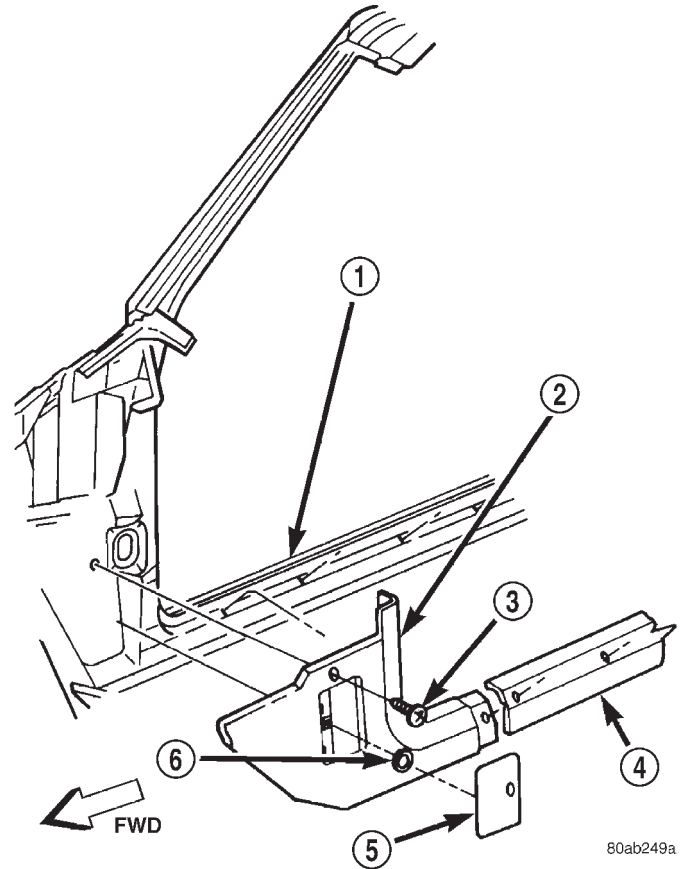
Right Cowl Side Inner Trim Remove/Install
